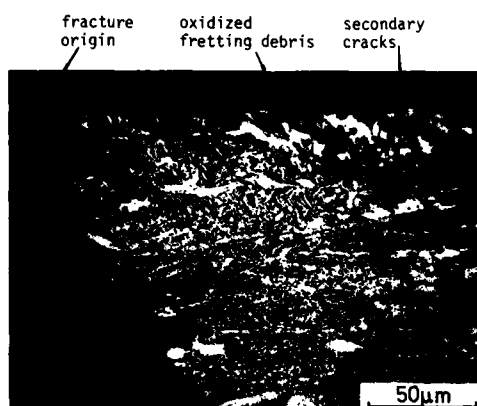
Fracture in milled specimen, tested at RT. Longitudinal section.
